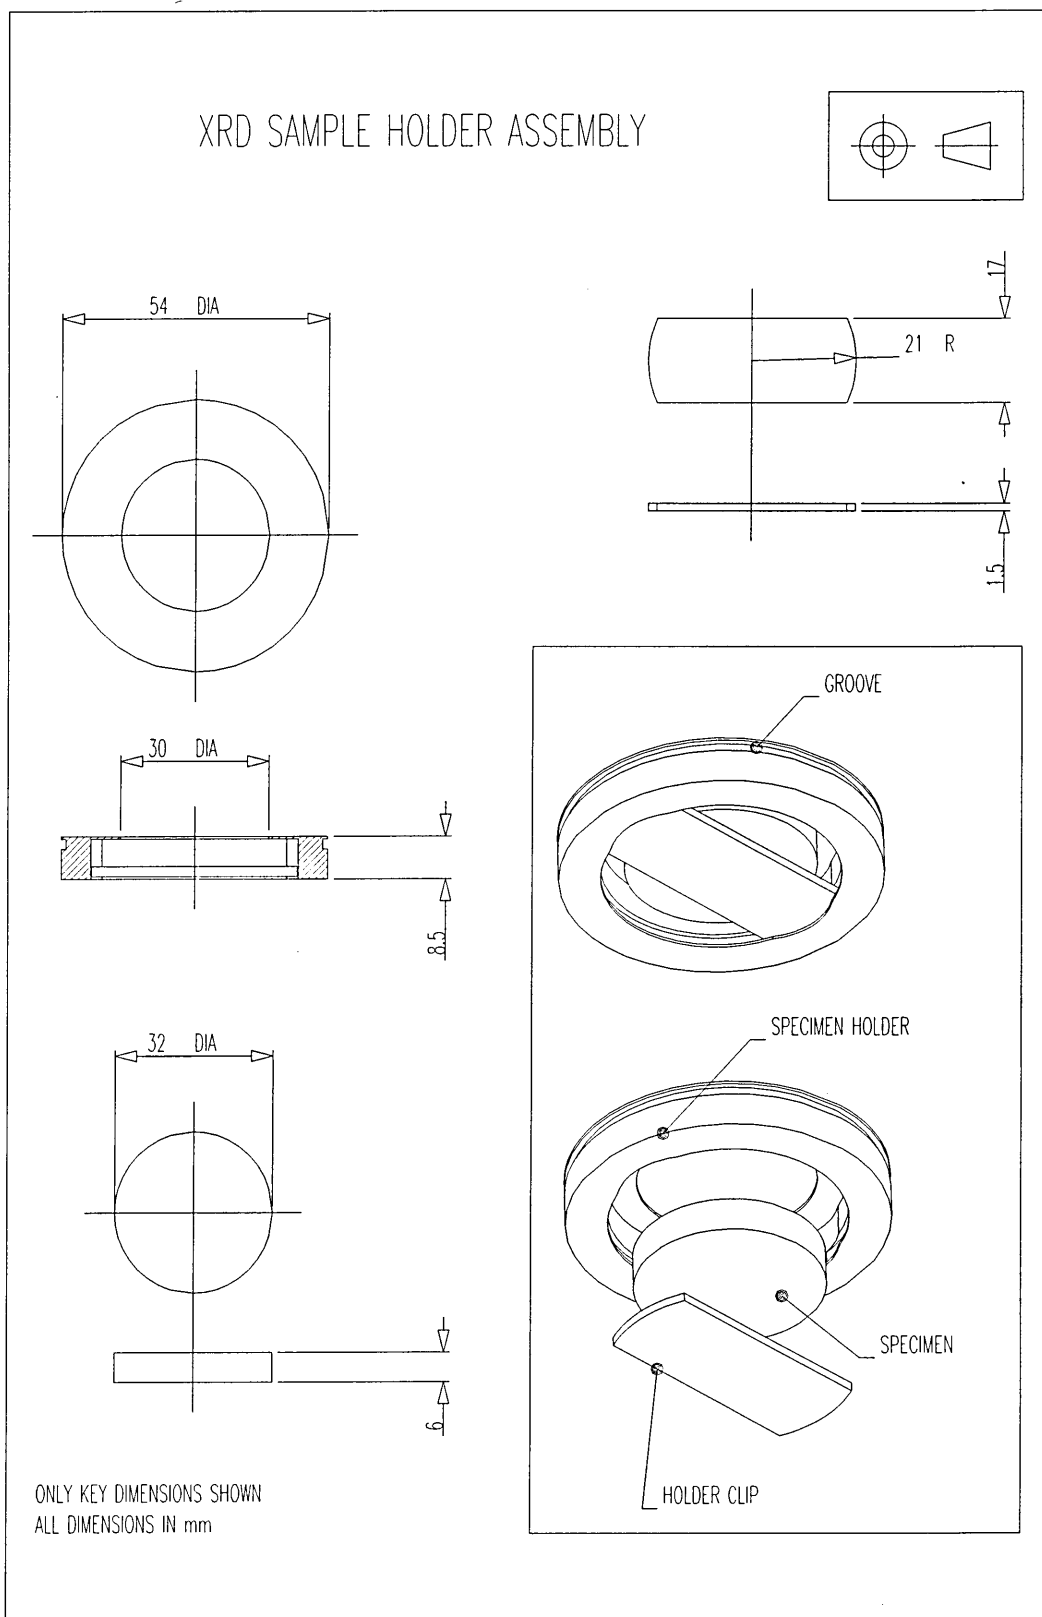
Specimen Holder Assembly for X-ray Diffraction Investigations of Disc Samples.
